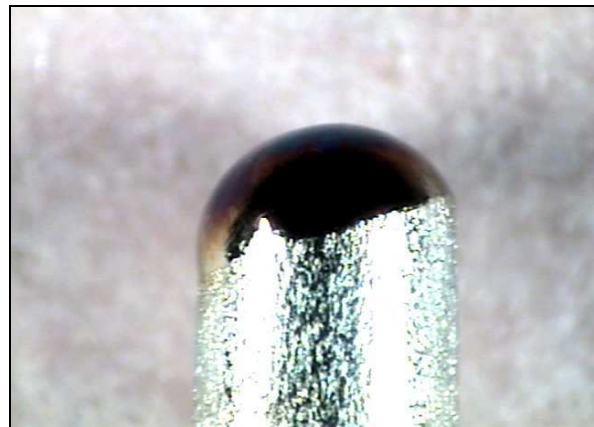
Titanium tube sealing with an asymmetric weld region.
